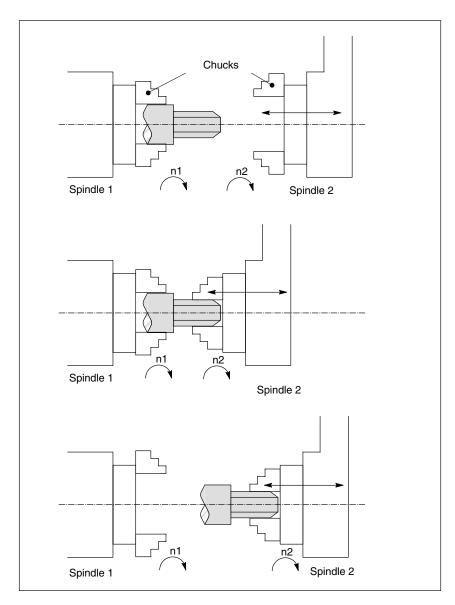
Synchronous mode, on-the-fly workpiece transfer from spindle 1 to spindle 2
